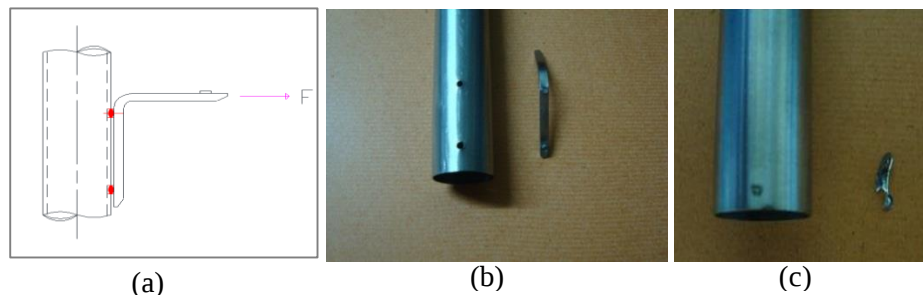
(a) Direction of pull (F) in peel test; Button pull-out failure for (b) bearing pad and (c) spacer pad
